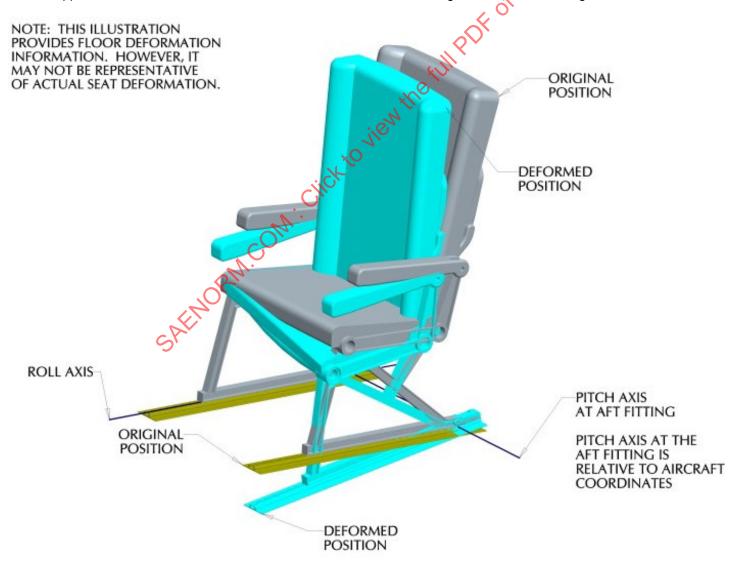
A - Schematic of floor deformation: seat legs attached at floor level
